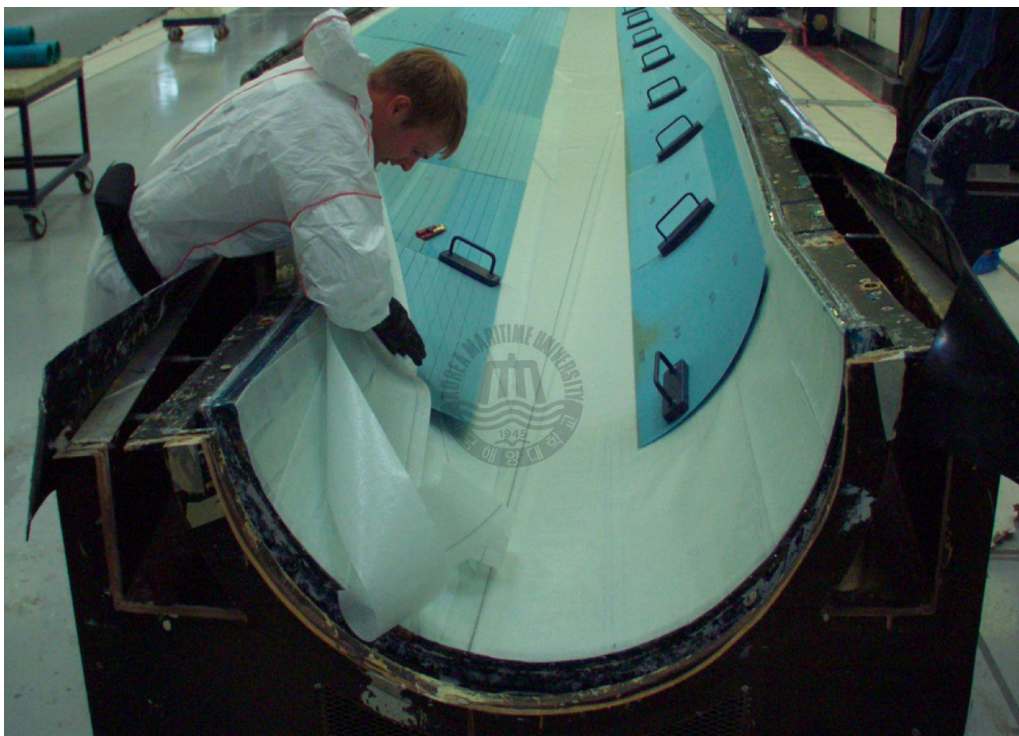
Lay-up process of vacuum bag molding process by prepreg materials
